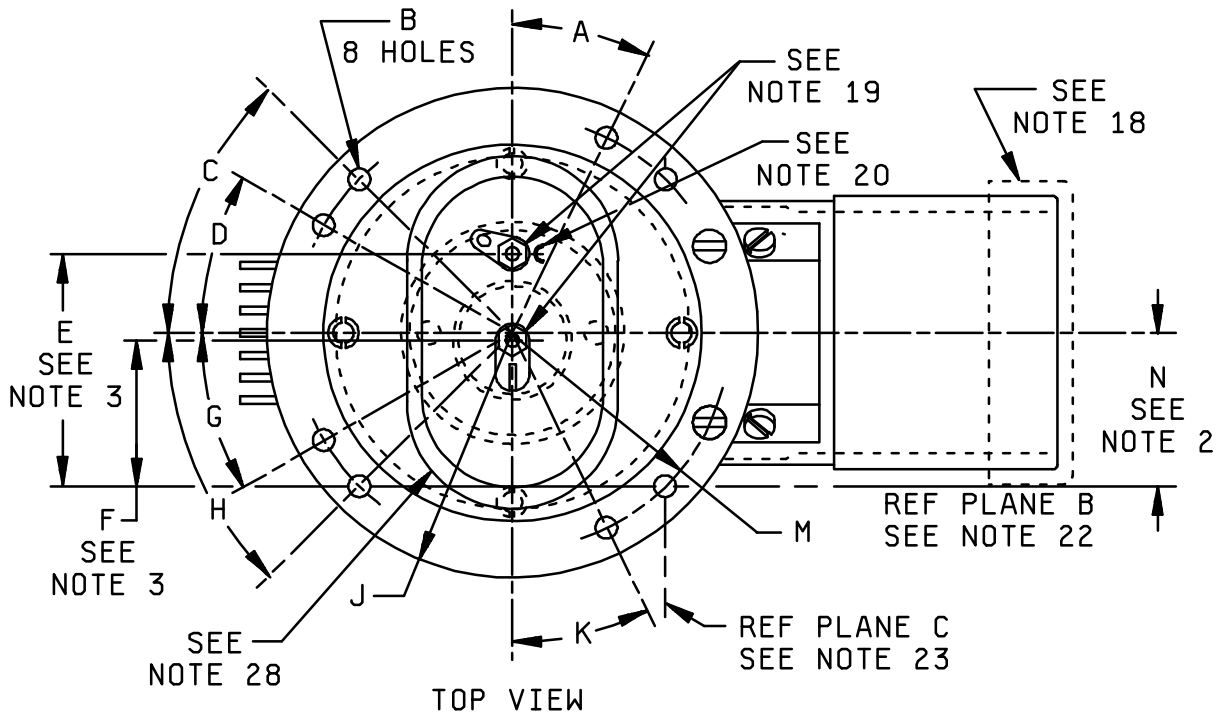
Outline drawing of electron tube types 5586 and 5657 - Continued.
